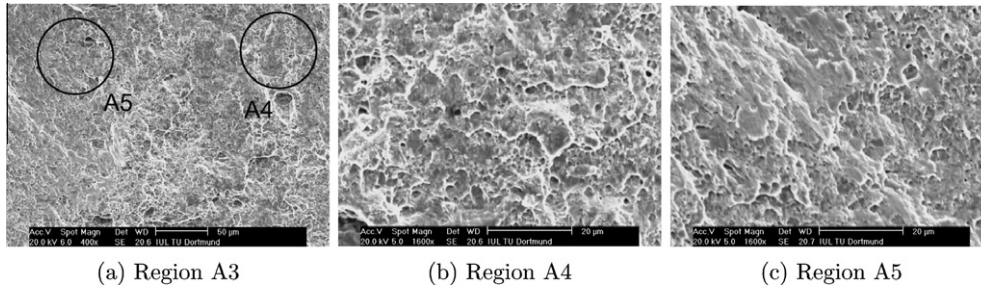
SEM fractographs from fracture surfaces, Part II.
